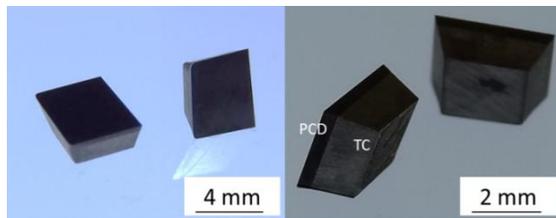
Examples for PCD samples of geometry 3 cut with the Laser MicroJet®.
